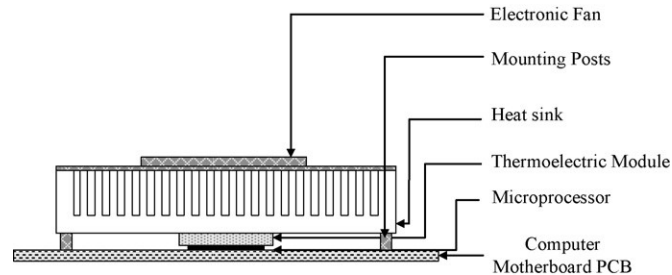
Thermoelectric module mounted in-between the microprocessor and standard heat sink assembly.
